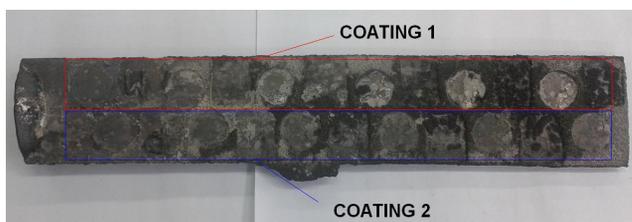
Casting after being knocked-out – from the side of shaped samples with protective coatings
